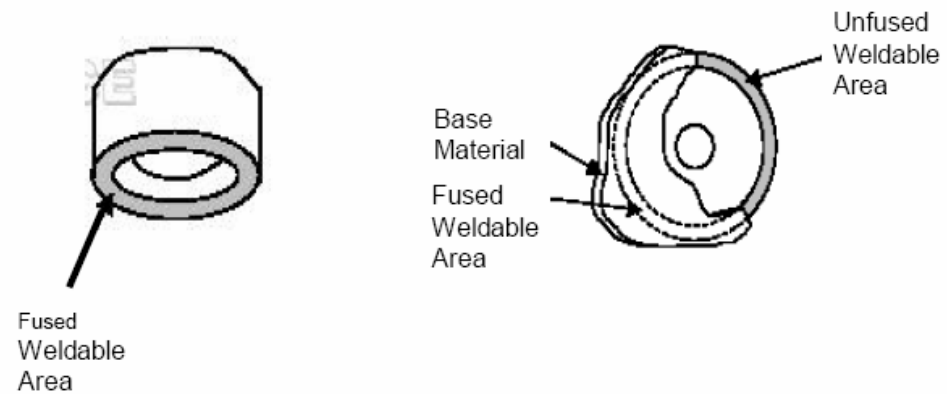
Measurement of Fused Area in a Drawn Arc Weld Nut
